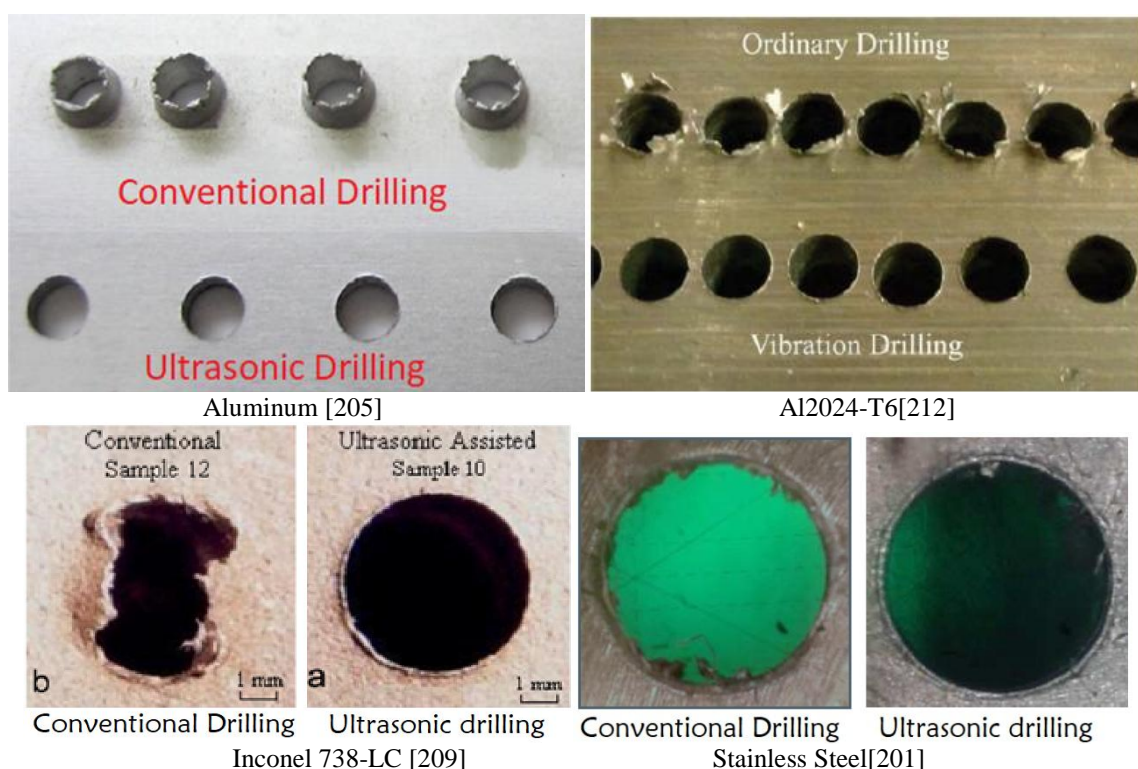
Examples of exit burr formed in conventional and ultrasonic drilling at same cutting parameters, drill geometries and drilling environments for various materials.
